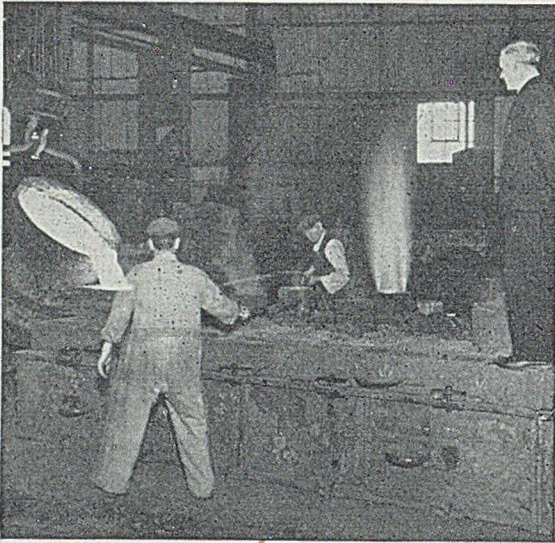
Pouring of the Diesel-engine Frame Casting showing the Rapid Escape of Gas from the Vents provided.
